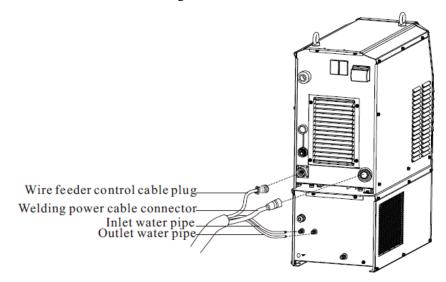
Schematic diagram for connection of welding power source
